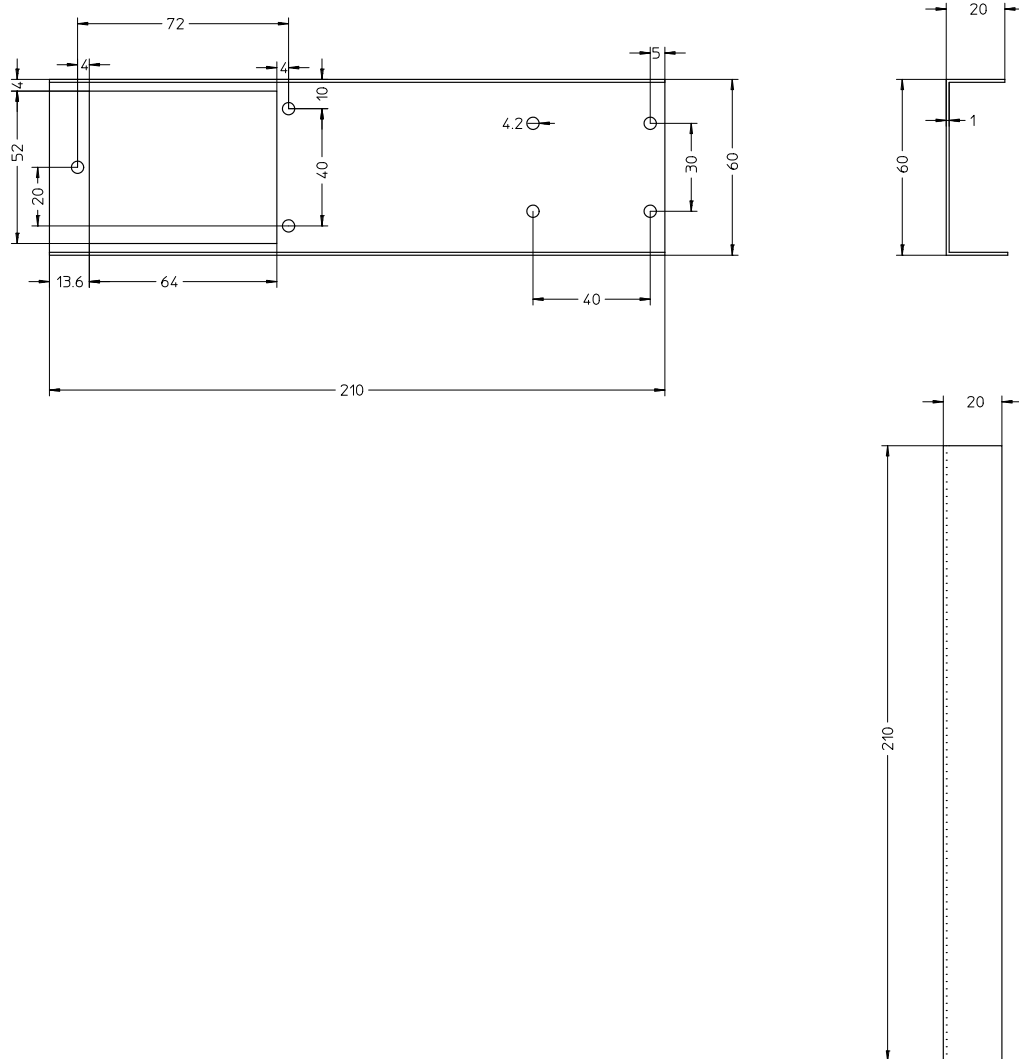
Mechanical drawing of the CCD bar that is screwed to the step from Figure A.3 and holds the CCD box.
